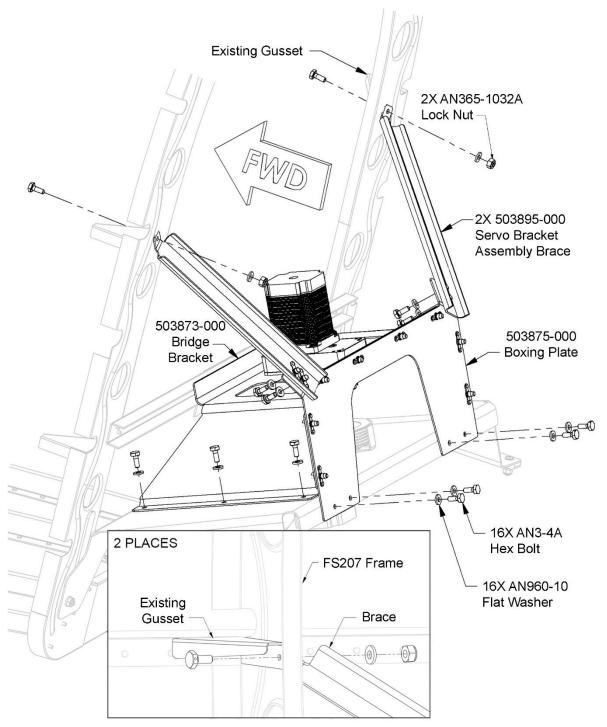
Unfastening Bracket Assembly Braces, Bridge Bracket, and /Boxing Plate.
